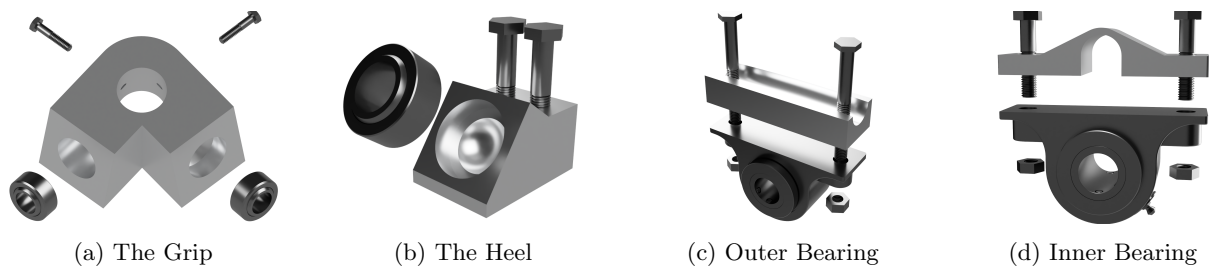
A closer view of CAD models depicting the Grip (a) and the Heel (b) with their swivel joints, as well as the bearings and clamps that attach the dome platform (c) and telescope platform (d) to the polar axle.
